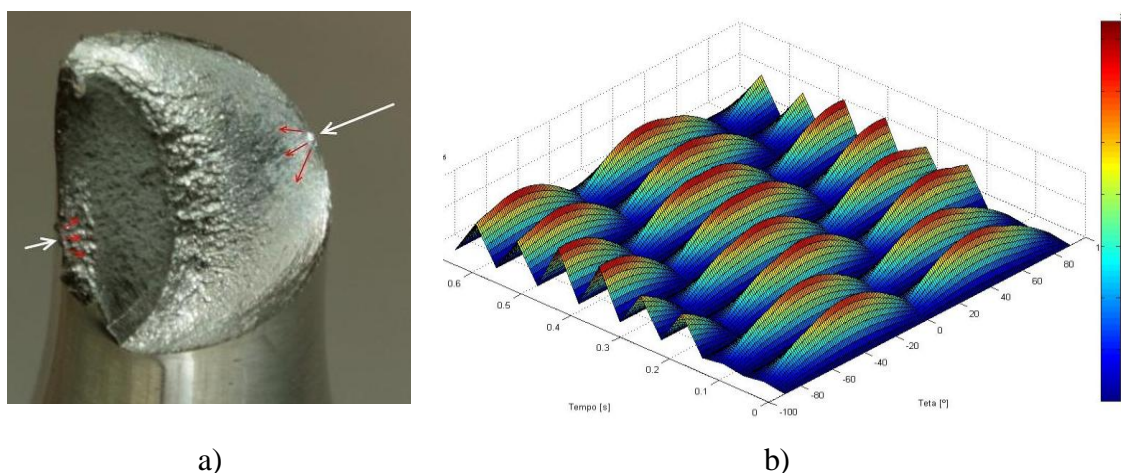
a) Fractographic analysis of fracture surface under sequential loading case 4; b) Brown and Miller evolution parameter in sequential loading path, case 5.
